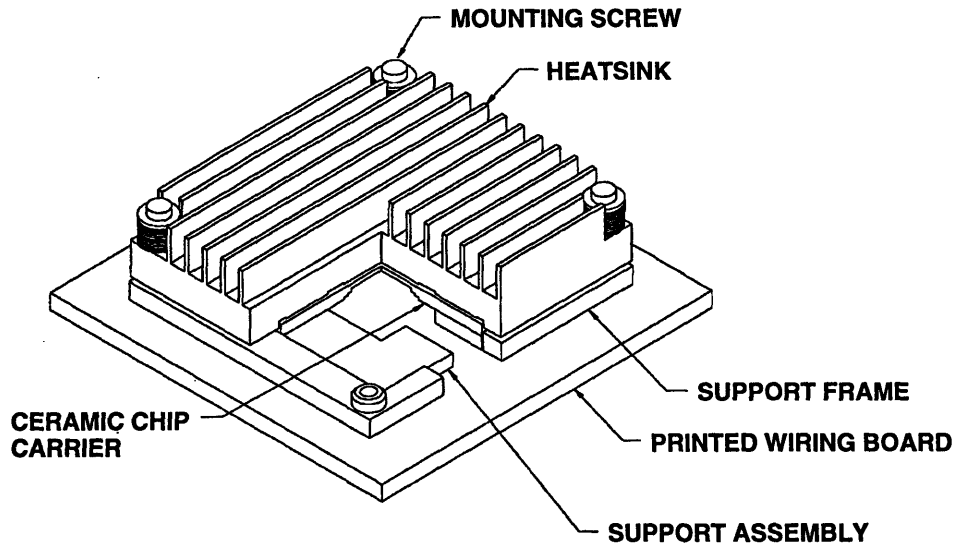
Cut away view of a VLSI package/heatsink configuration.
